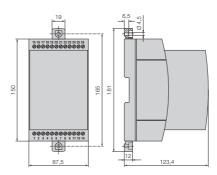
SINEAX DME 401 in housing T24, screw hole mounting brackets pulled out.
